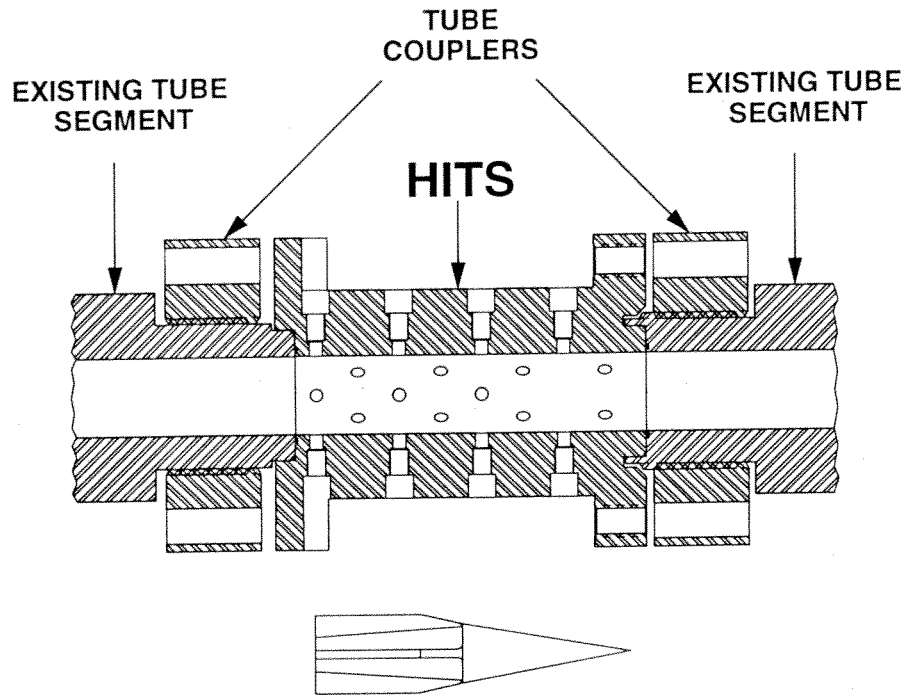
Highly instrumented tube section (HITS), tube couplers, and existing tube ends. Projectile shown for scale.
